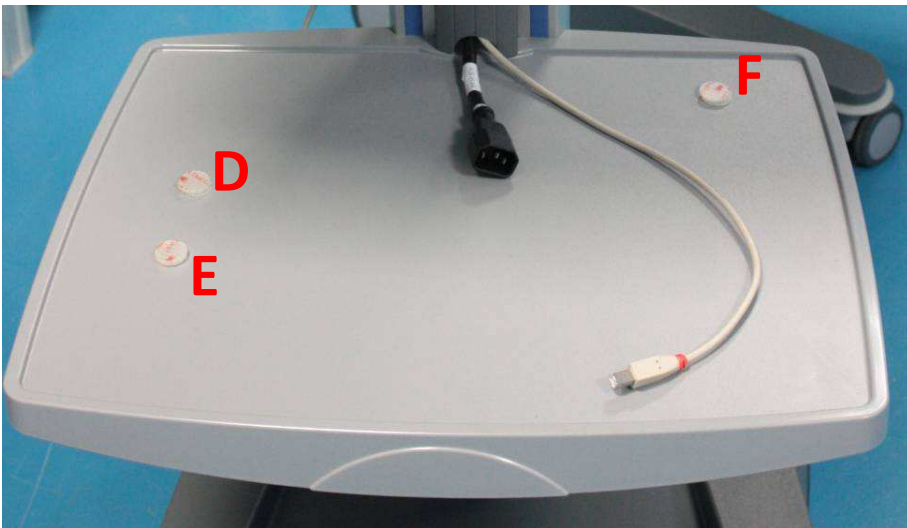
Placement of the self locking mushroom head fasteners on the trolley lower shelf
